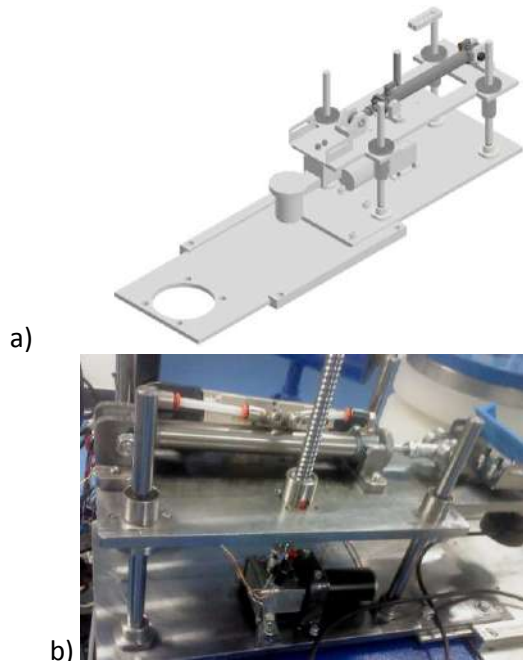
Mini-platform after improvements: a) 3D model; b) completed assembly
